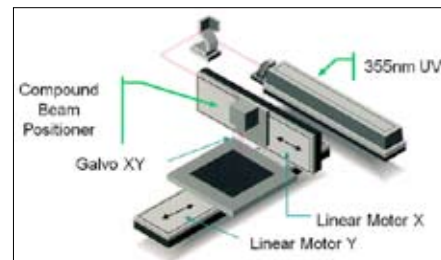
Schematic of an ESI laser drill for PSB via drilling. The XY galvo scanners are mounted to the X linear motor and the chuck that holds the PCB is attached to the Y axis linear motor. 'On the fly' laser drilling is used, the translation stages moving throughout.
